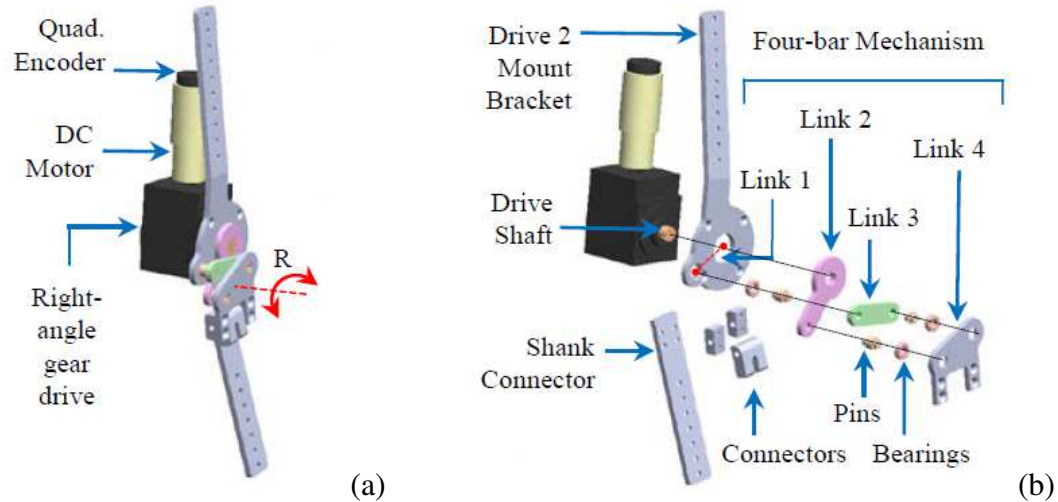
(a) Anthro-X assembly, (b) exploded view with identified components [38]. © 2018 IEEE.
